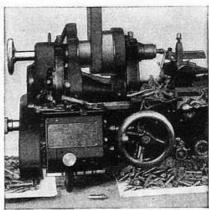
An 11-inch Lathe with Hand Wheel Draw-in Chuck
